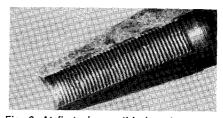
At first glance, this insert may appear to be in good condition. Closer inspection, however, shows crushed and worn serrations which could lead to slippage of the strand or possible strand failure at the chuck during tensioning.
